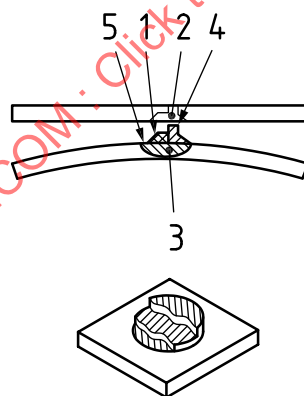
Measurement of weld diameter for partial thickness failure
